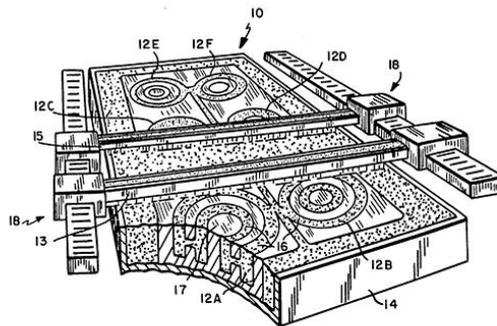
Three-dimensional printing techniques¹²⁶
